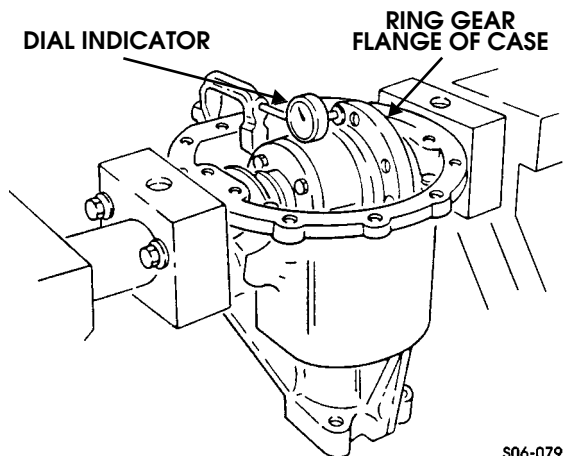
Dial Indicator Positioning For Case Runout Check
